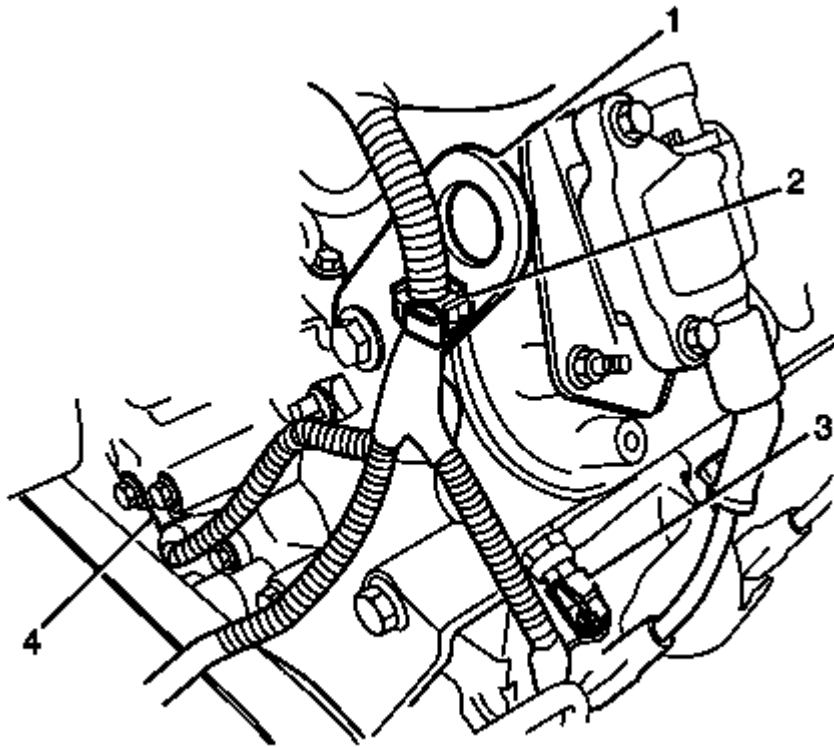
View Of Camshaft Position Sensor Connector, Coolant Temperature Sensor Connector & Engine Lifting Bracket
